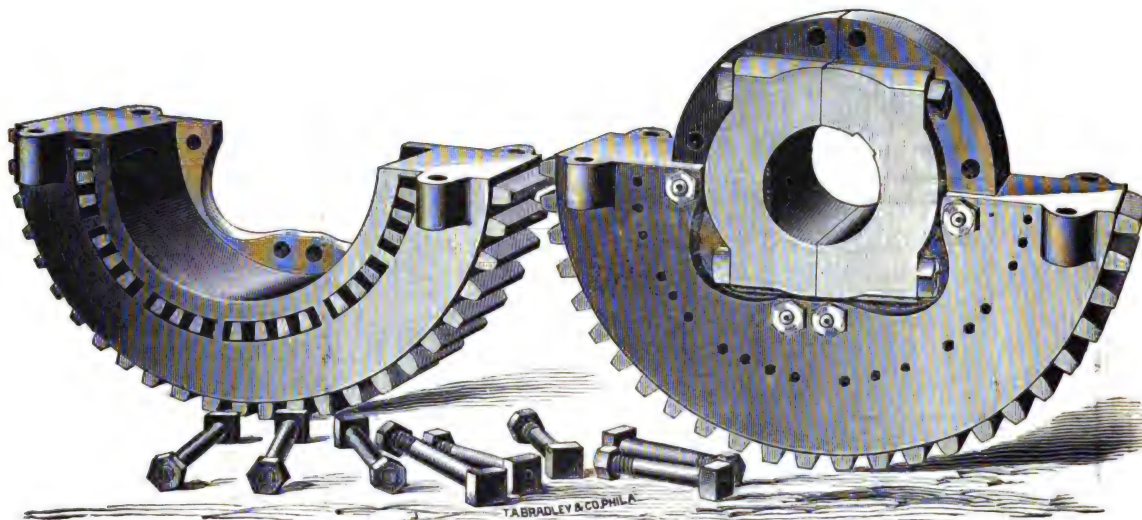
SPLIT AXLE GEAR, SHOWING HUB AND SECTION OF COGGED RIM REMOVED.
